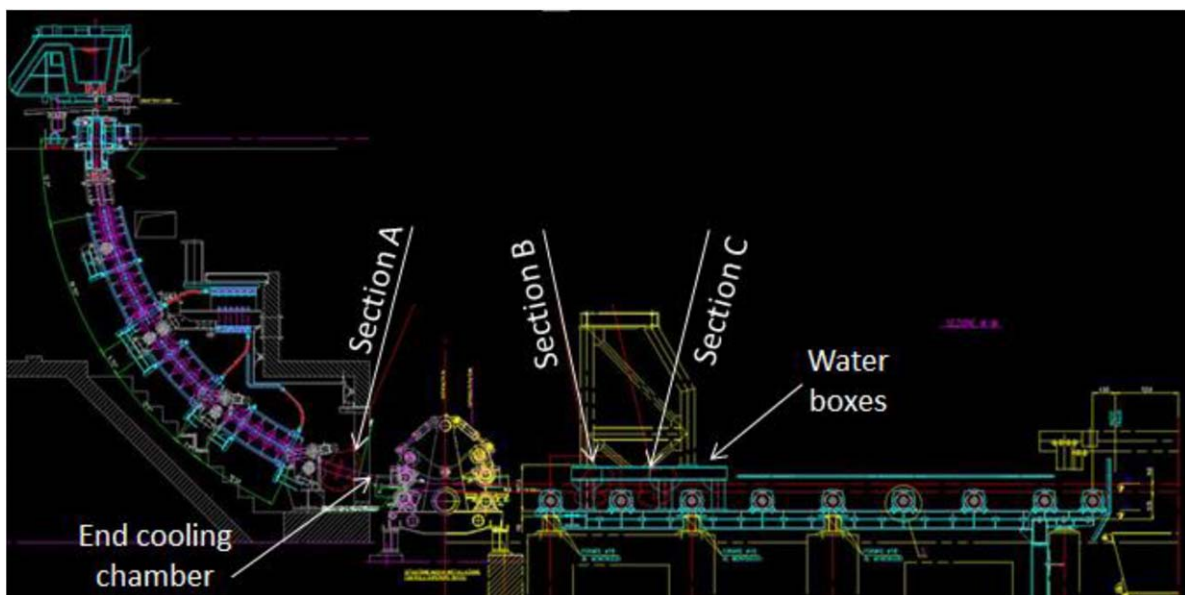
FENO continuous casting machine layout: section A (10 m), section B (14 m) and section C (15.5 m).
